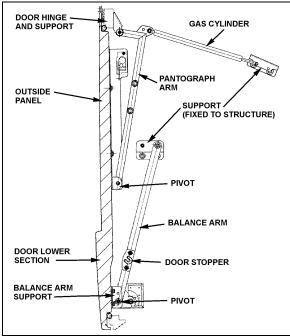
BAGGAGE COMPARTMENT DOOR
